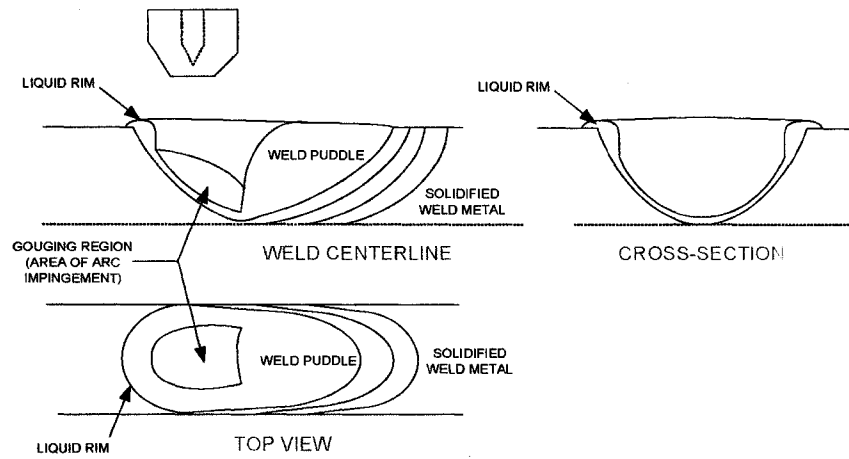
Low Speed Stable Gouging Regime – No Weld Bead Humping
